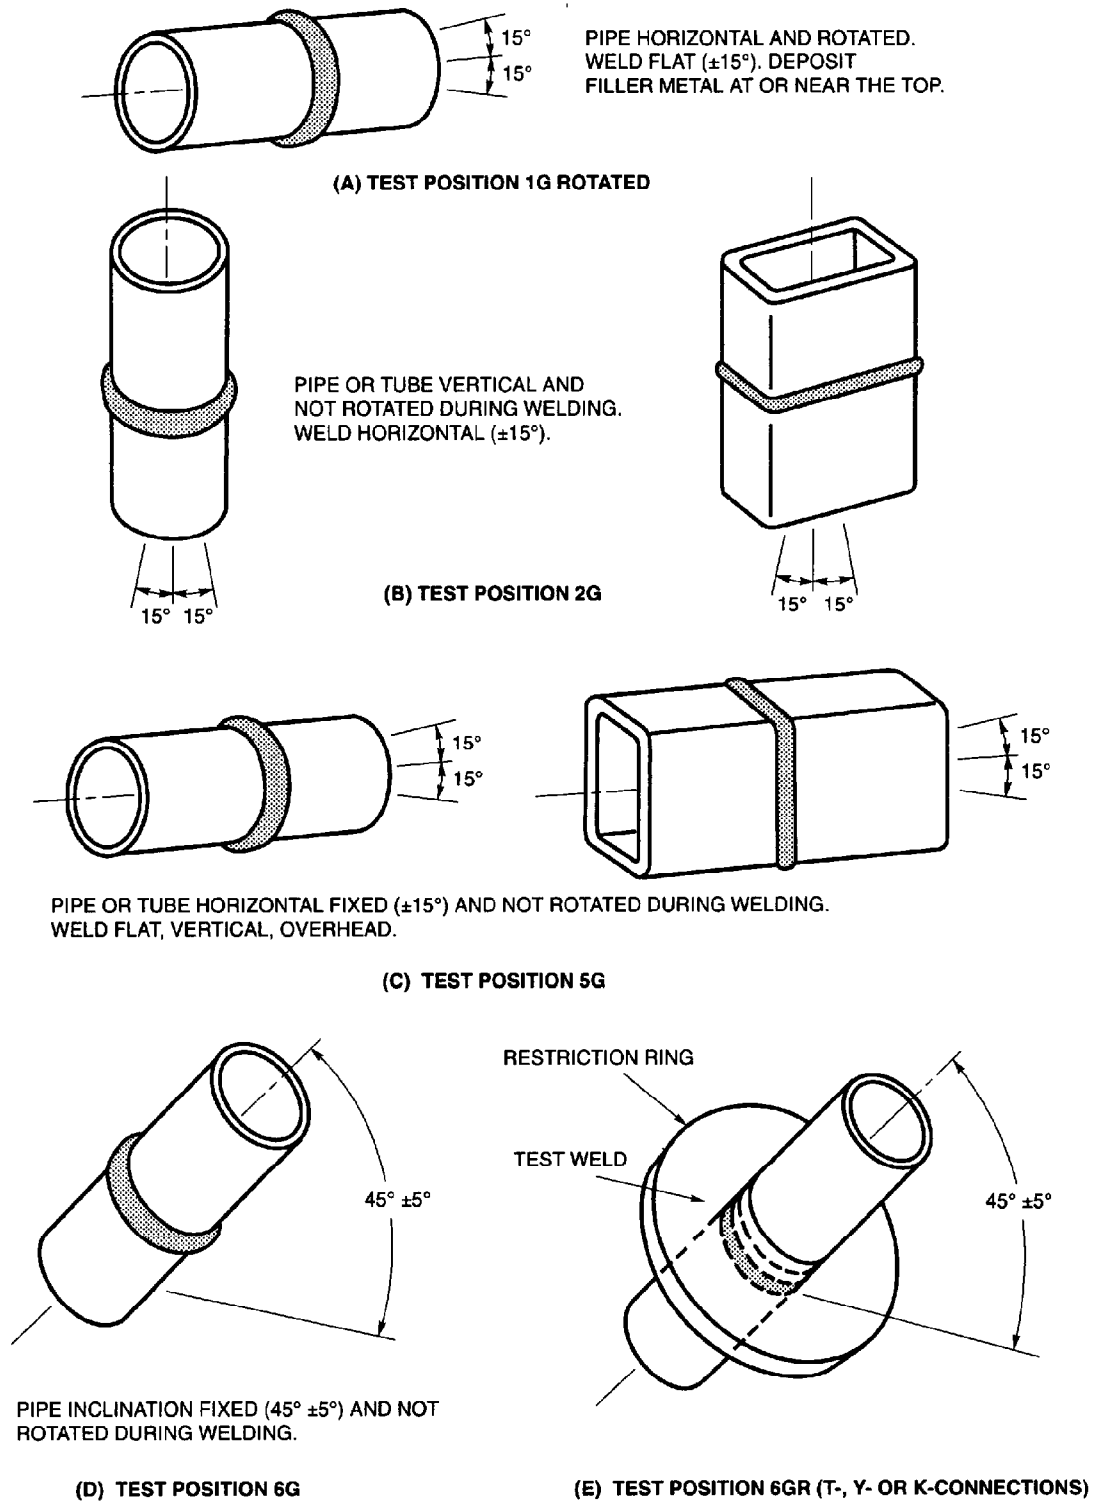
Positions of Test Pipe or Tubing for Groove Welds (see 4.2.4)
